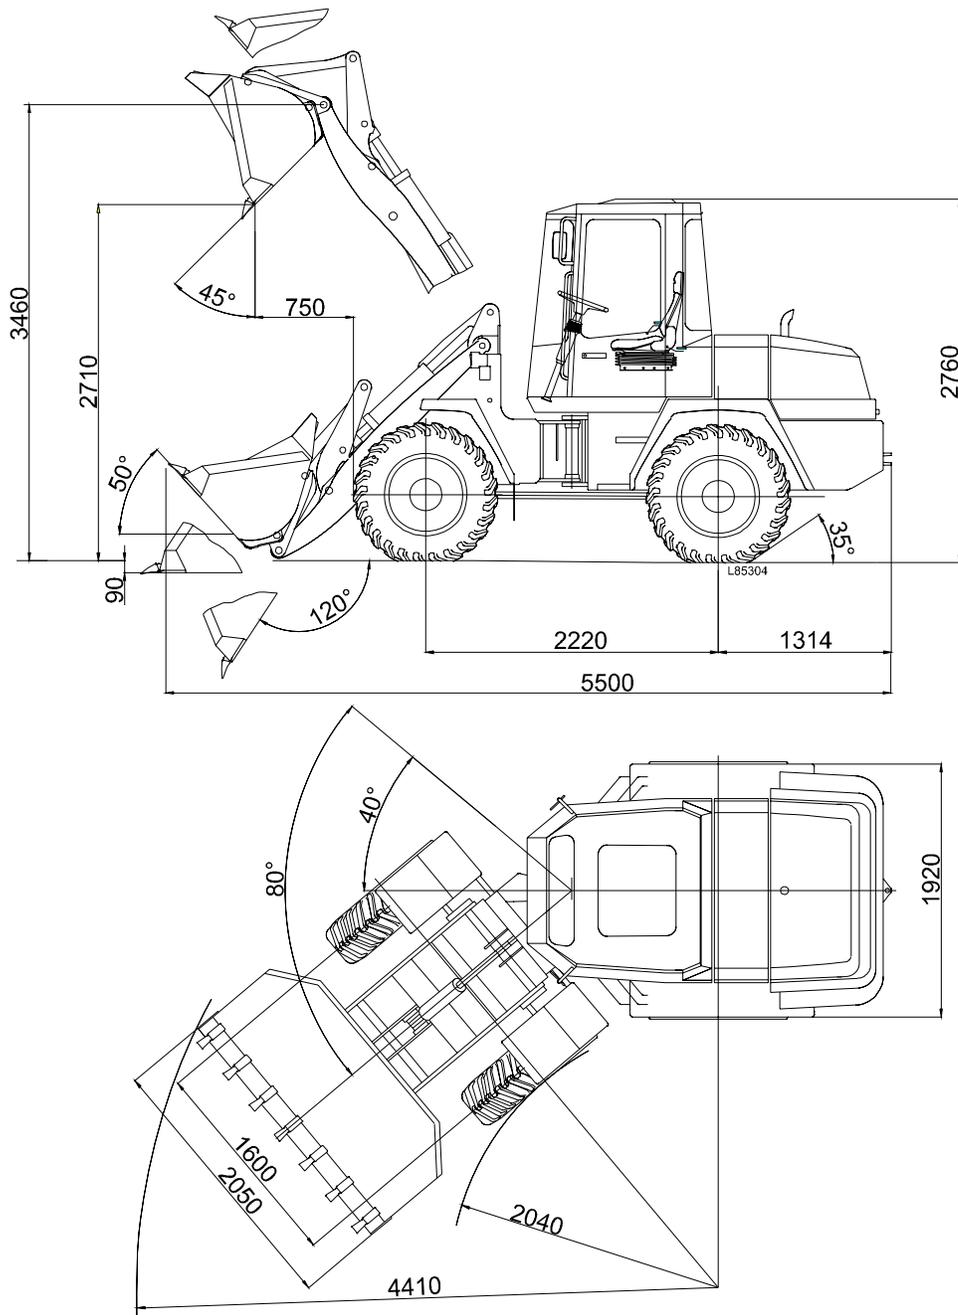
Dimensioned drawing with general-purpose bucket
